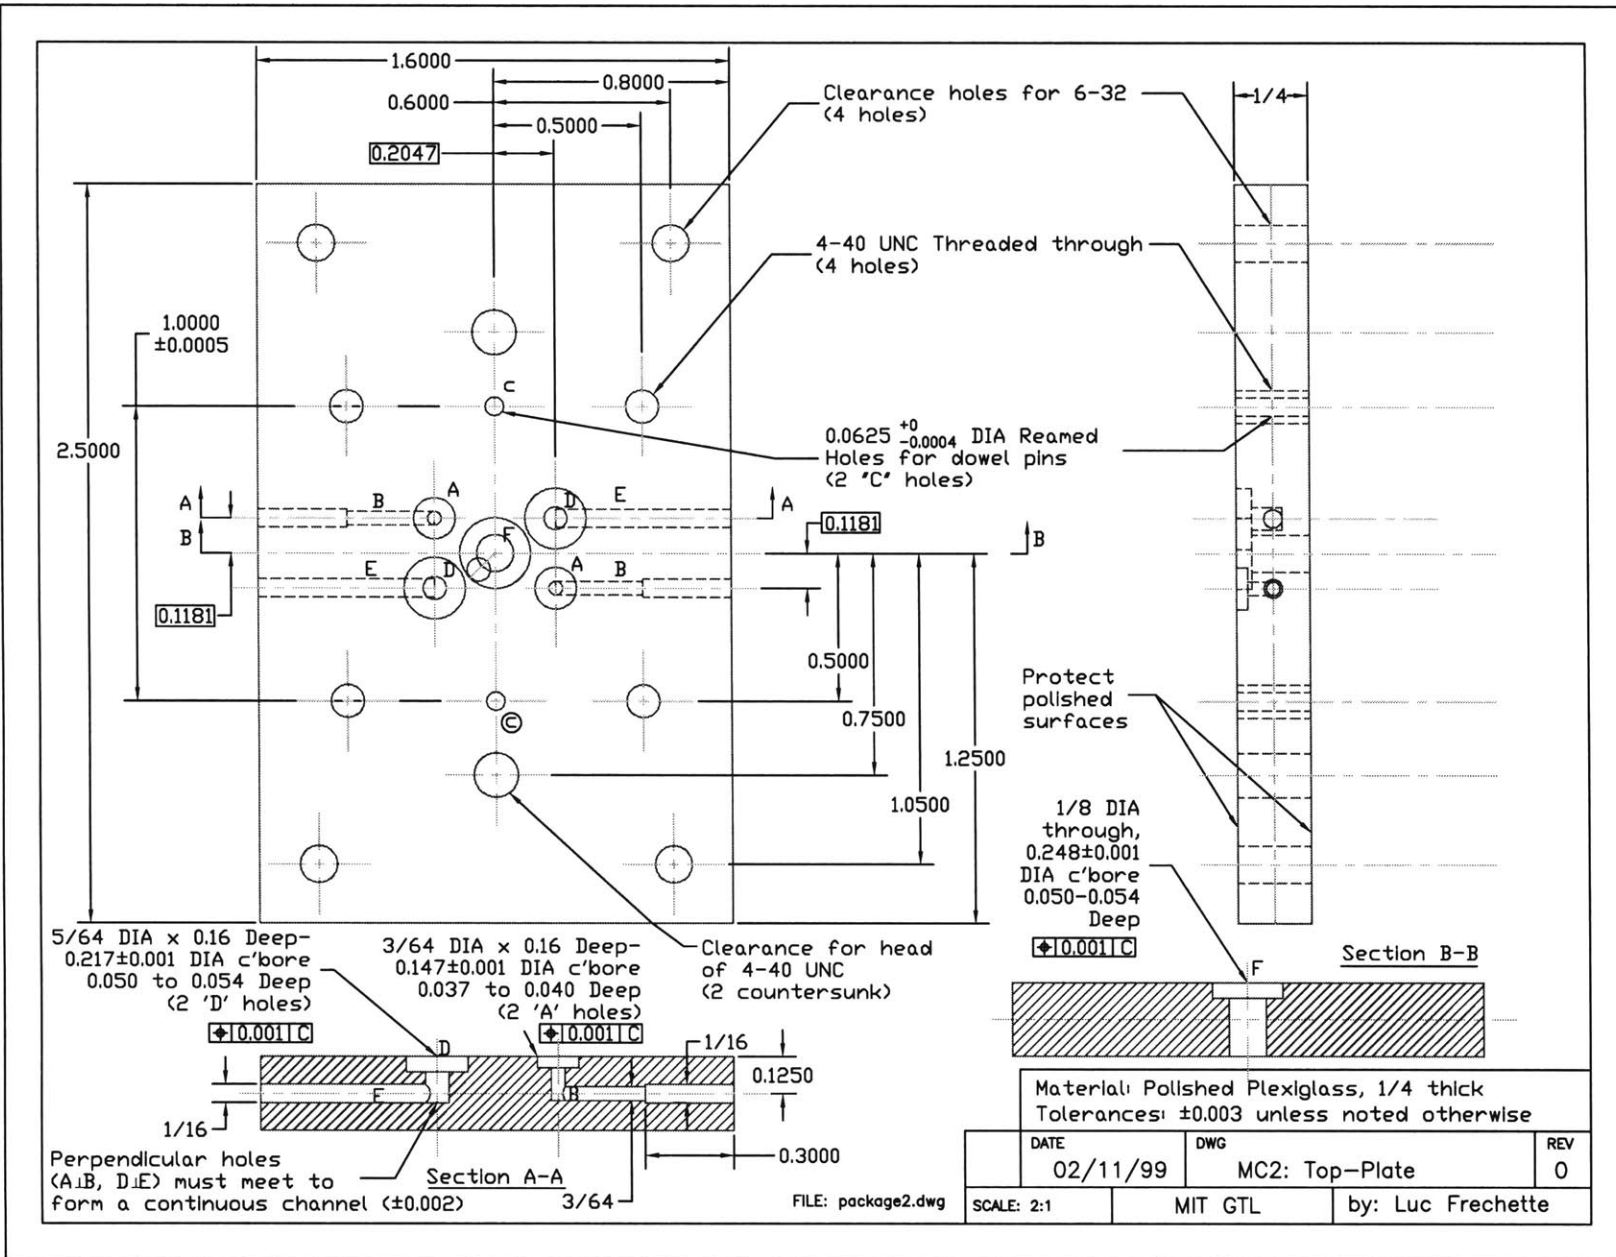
Technical drawings of the MC-Bearing rig and Motor-Compressor package - Top plate
